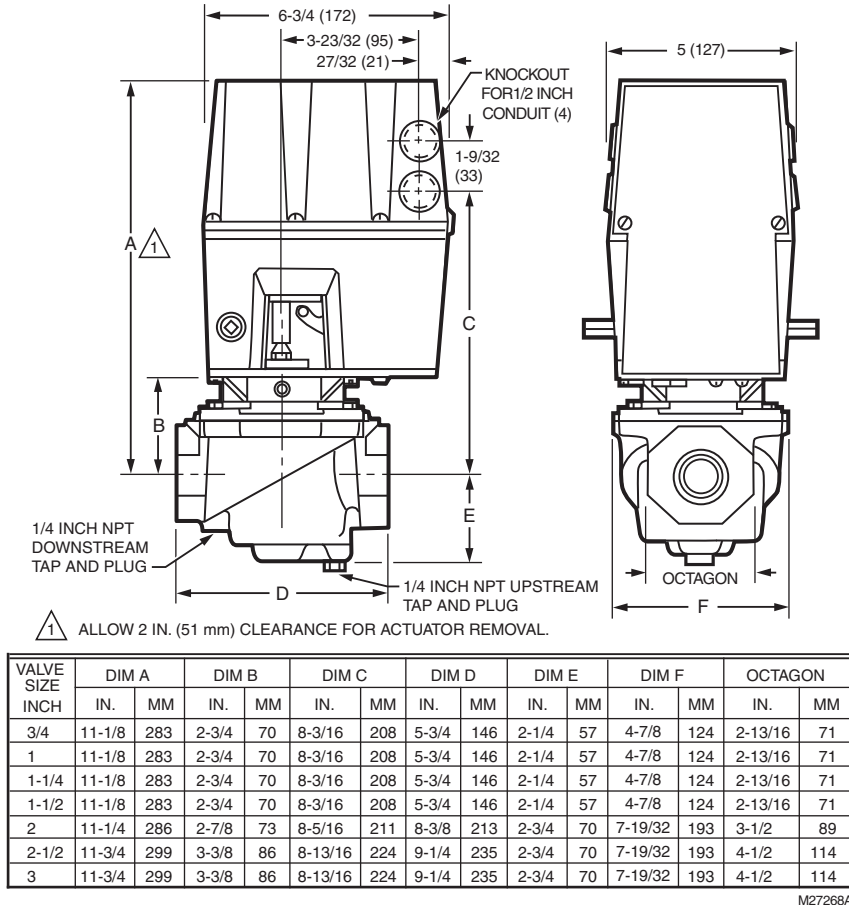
Approximate dimensions of the 3/4 through 3 in. V5055 Valves, with valve actuator, in in. (mm).
